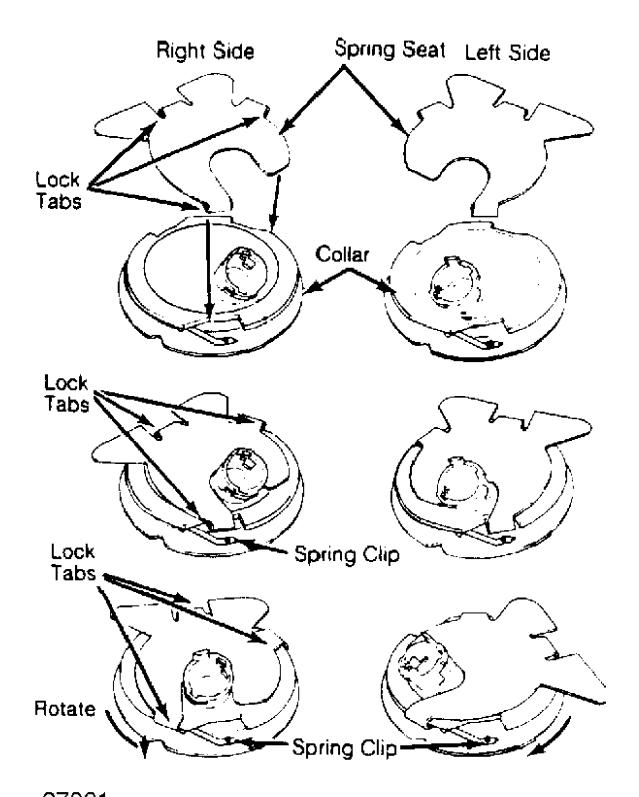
Air Spring & Solenoid Courtesy of Ford Motor Co.
